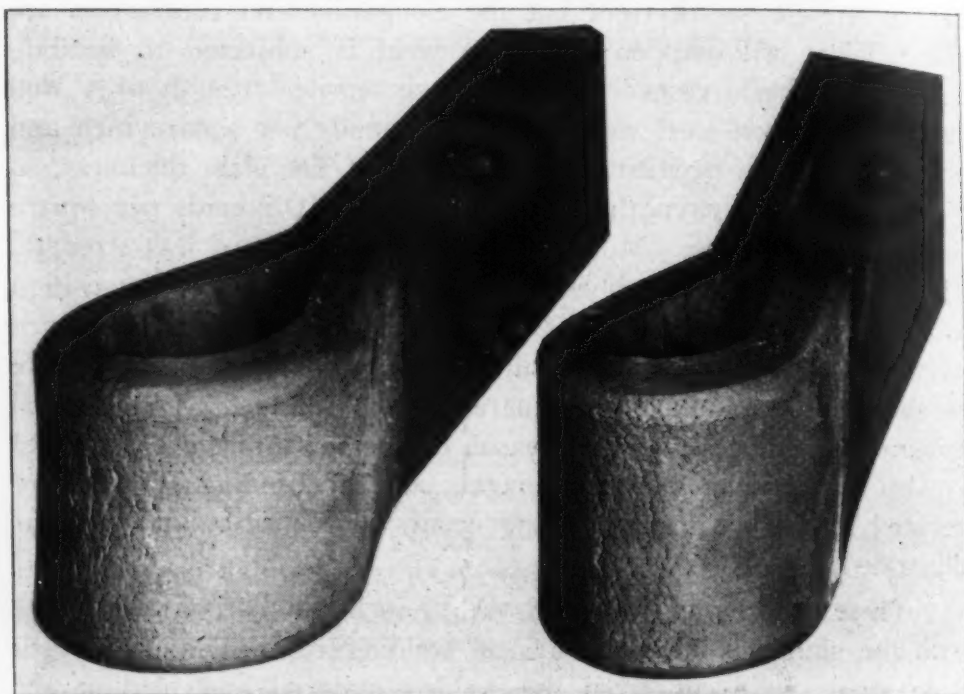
Bending Tests of Welds, Actual Size.
